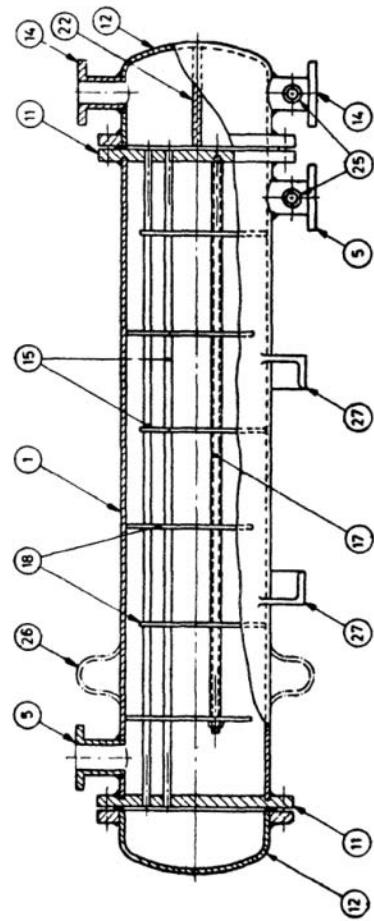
FIXED TUBE PLATE TYPE HEAT EXCHANGER
